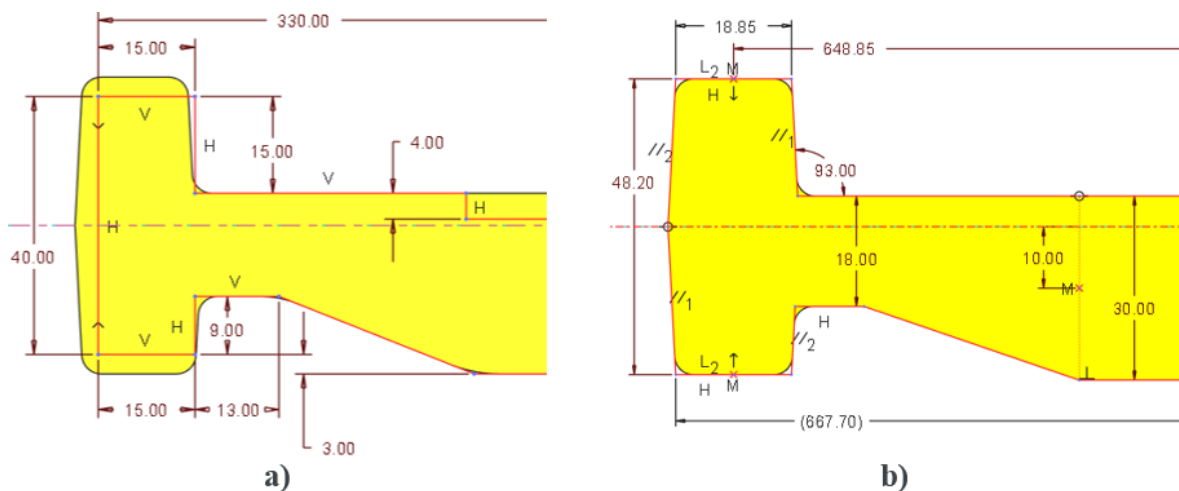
a) Typical modelling technique. Red line represents the base shape (machined) within the casting. b) Modelling style allowing wall thickness tolerancing.
